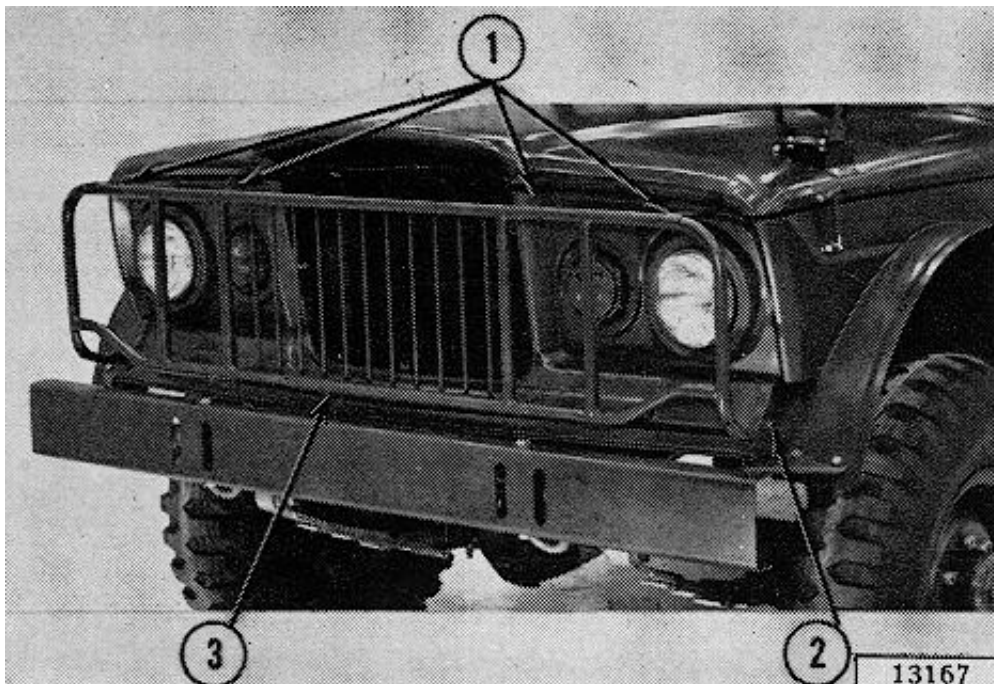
GRILLE GUARD REMOVAL AND INSTALLATION
